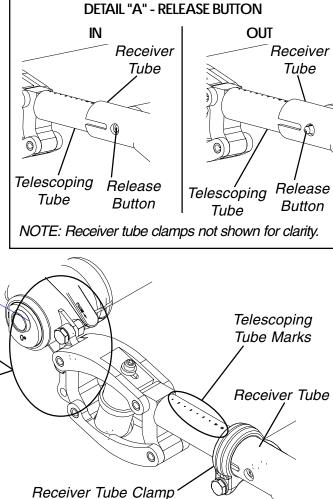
REMOVING/INSTALLING TELESCOPING TUBES
